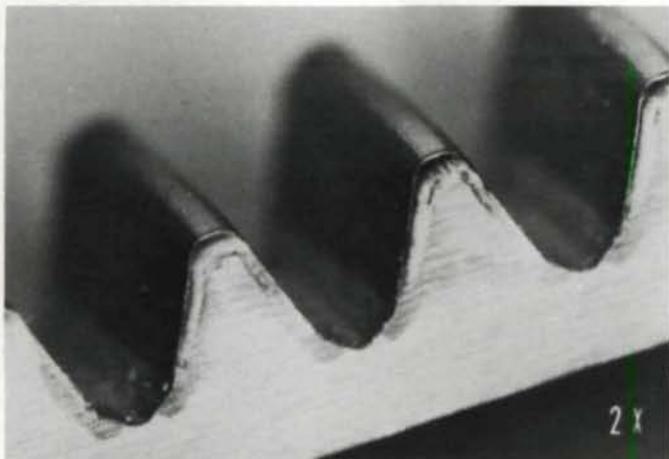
15 DP hob illustrating catastrophic tooth failure due to excessive cratering caused by hobbing too many linear inches.
